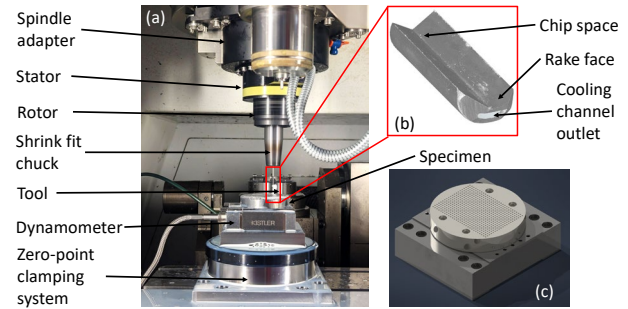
The experimental setup used, showing (a) the setup in the machining centre, (b) 3D scan of the tool and (c) 3D construction of the mounted and pre-piloted specimen.
